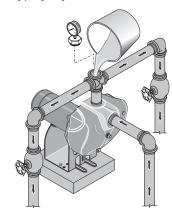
Remove Priming Plug and Fill Pump Before Starting
